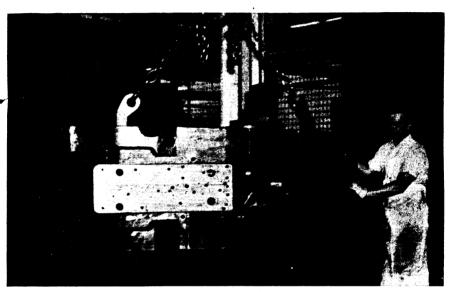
Removing a partially completed die from a duplicating machine. Steel for dies and die components must be of exceptionally high quality—especially for a die of this size—since low part cost depends largely on a long die life.
